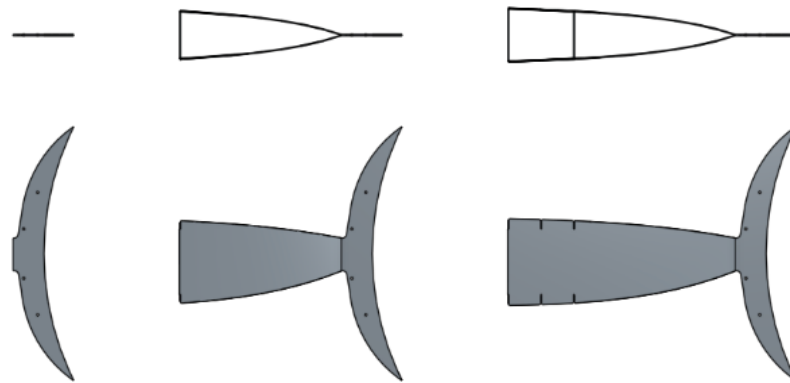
Plan and elevation views of zero, single, and dual-ribbed caudal fins
